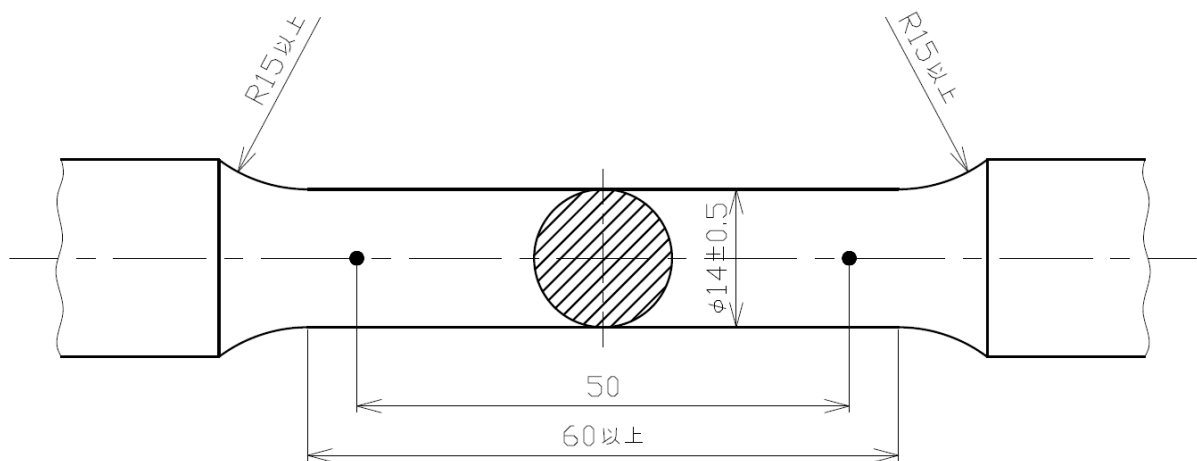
Shape of specimen for tension test (JIS Z2204, No. 4).
